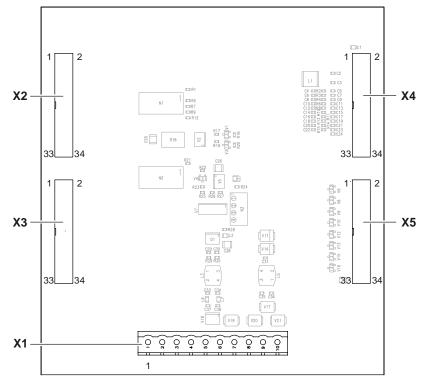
Printed circuit board view of EVAC-NL connector board FTI2002-N1
